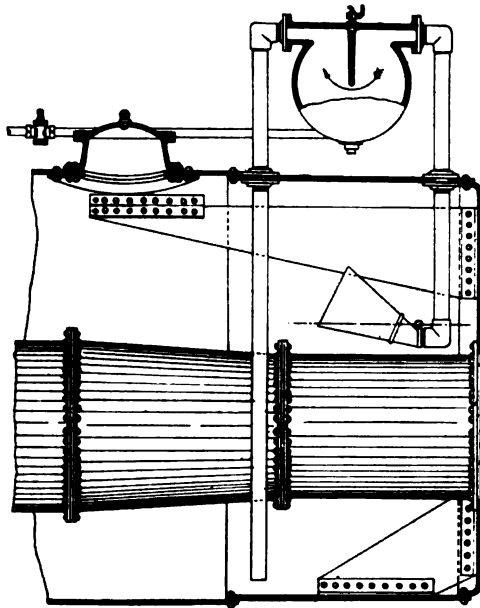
CIRCULATOR FIXED ON A LANCASHIRE BOILER.
